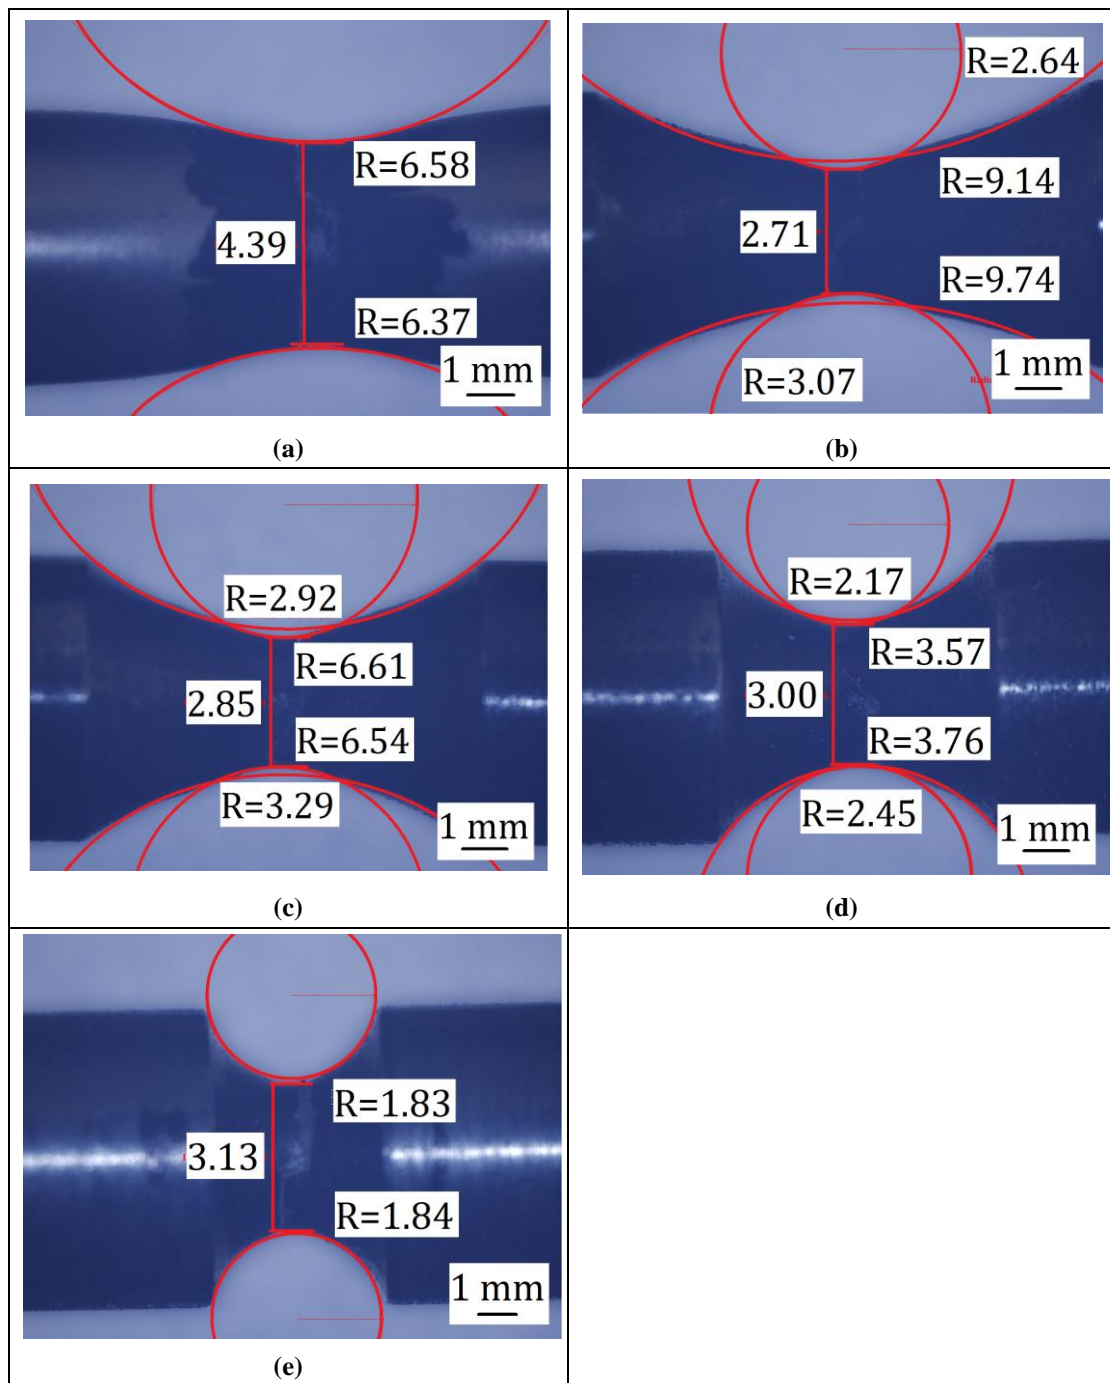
The measurements of all kinds of the specimen after fracture. (mm)
